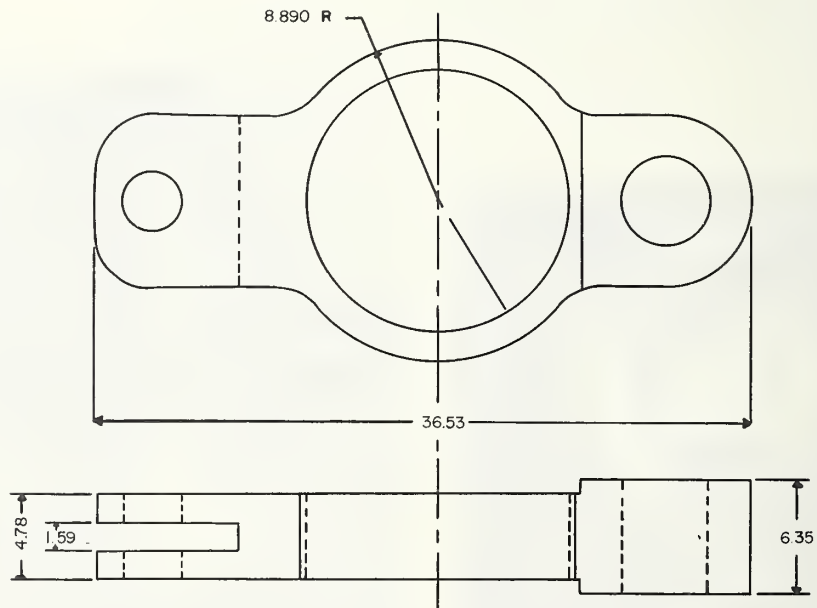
Load cell for Kossel camera module. Dimensions in millimeters.
